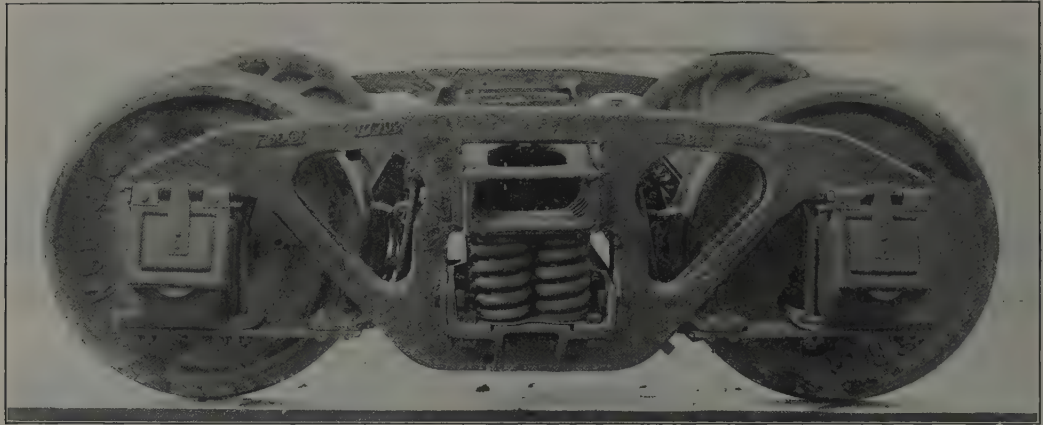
Pennsylvania Railroad 70-Ton Capacity Truck with Crown Cast Steel Side Frame.
